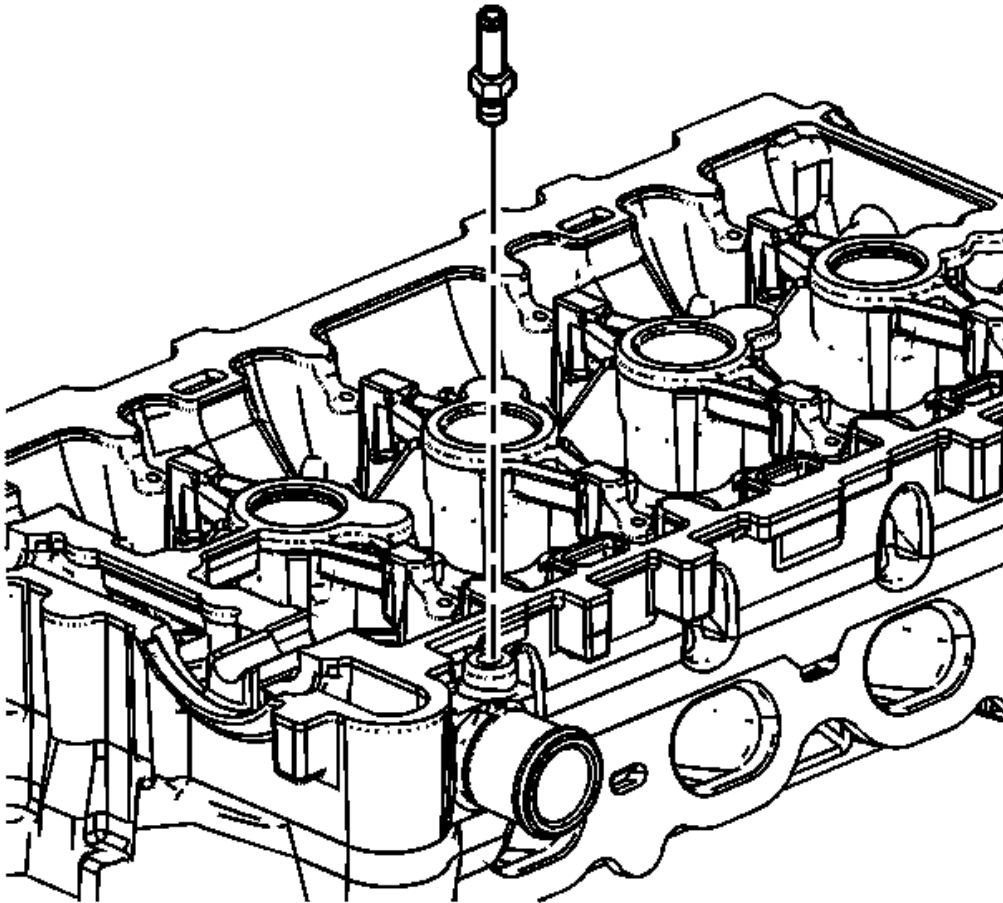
Identifying Cylinder Head Air Bleed Tube
